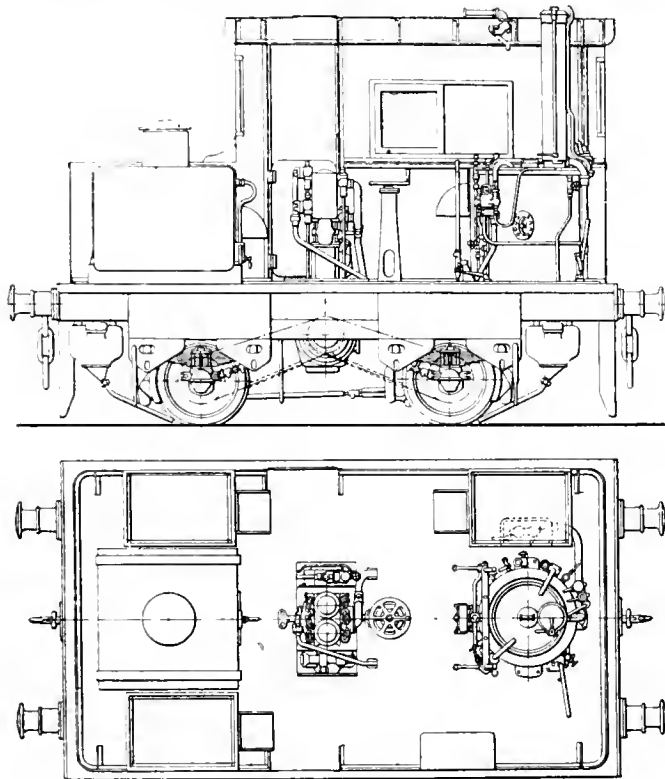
Plan and Elevation of the Locomotive Showing Arrangement of Boiler and Driving Mechanism
